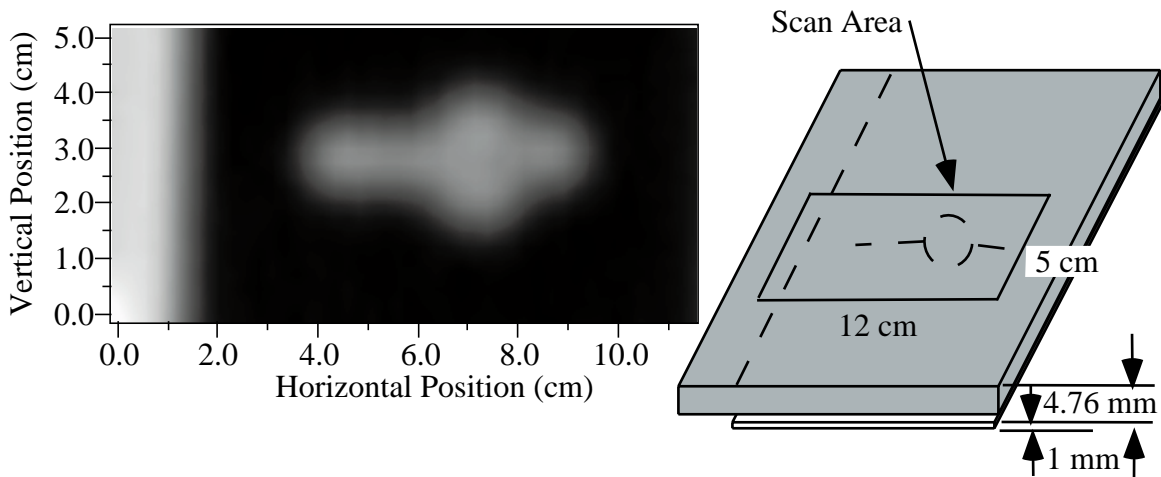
C-scan and sample geometry for detection of fatigue crack through 4.76 mm unflawed aluminum plate.
